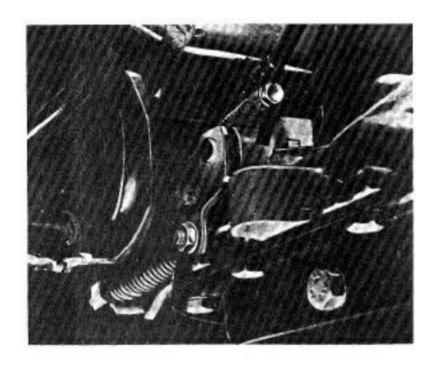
Transmission removal. Loosen the selector cable clamp nut (center arrow), push the boot away, screw apart the cable sleeve (left arrow), and remove the sleeve. Remove the ground strap (upper arrow).
